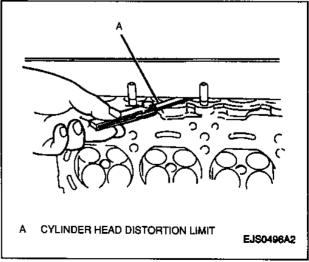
Measuring Intake Manifold Seating Surface Distortion
